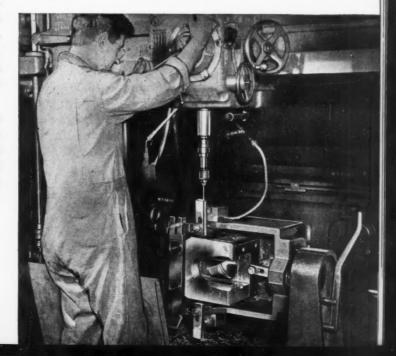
A radial drilling machine is employed in producing some of the many holes required in breech-rings
